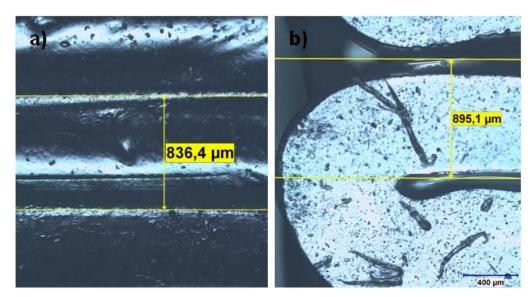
25: a) Top face of a produced part; b) bottom face of the same part
